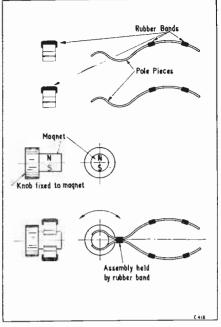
An alternative type of magnetic picture centring device. The upper part of the diagram shows the component parts, the complete assembly being at the bottom
